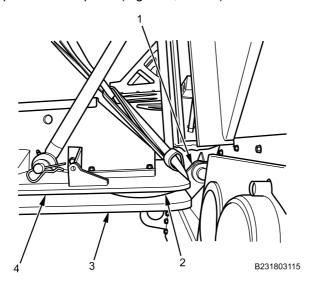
Loop Lifting Sling Around Door/Ramp Right Hinge.
